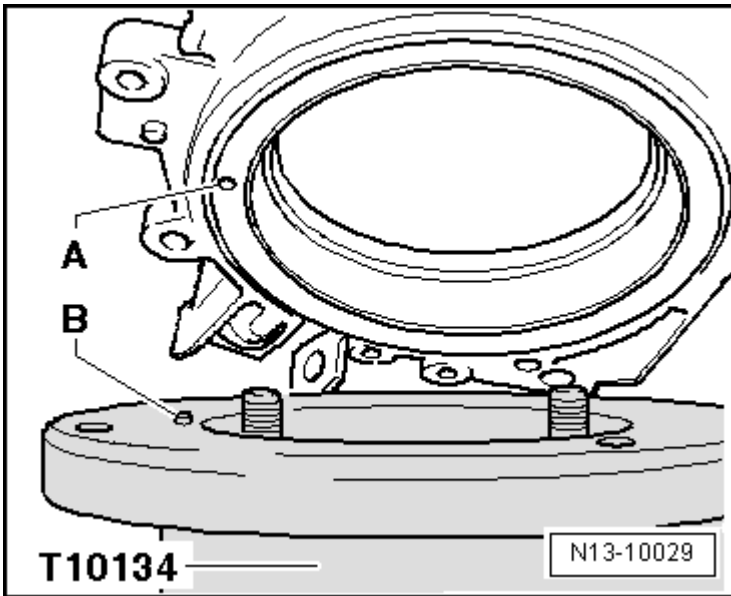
Identifying Front Side Of Sealing Flange Placed Onto Assembly Tool T10134 To Position Locating Pin In Bore Of Sensor Wheel
